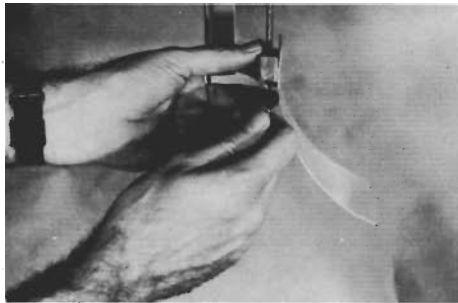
B Loosen set screws to lower blade for level sensing. Inside curve of blade faces material.
